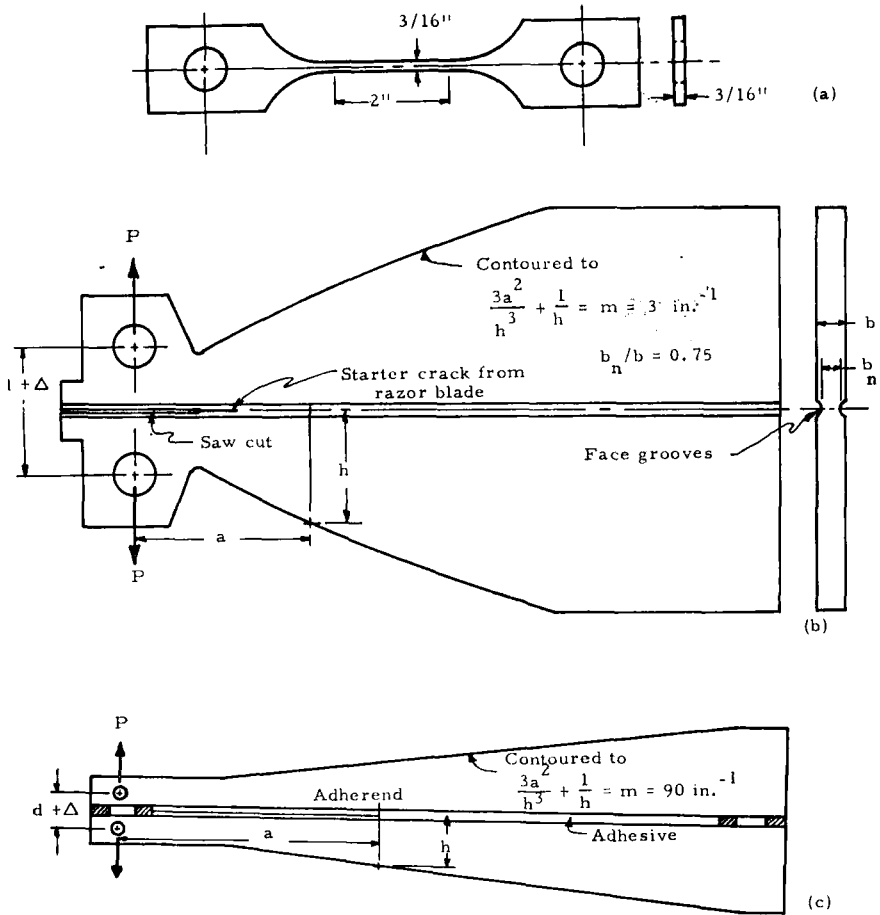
Schematic diagrams: (a) tensile specimen; (b) Tapered double cantilever-beam specimen ($m = 3$) (bulk specimen); (c) Tapered double cantilever-beam specimen ($m = 90$) (joint specimen).
